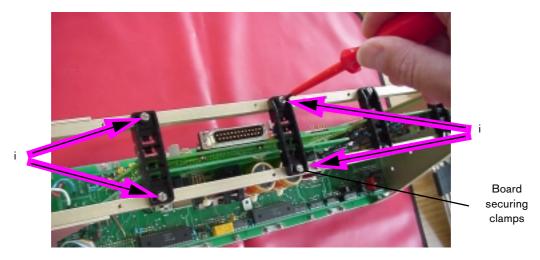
Securing the board securing clamps to the frame of the electronic unit
